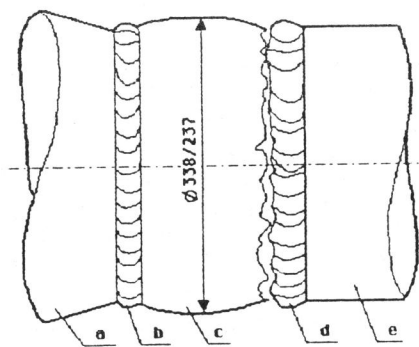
Schematic view of failure position: a) valve chamber b) manufacturing weld, c) append pipe, St 45.8 steel d) assembly weld, e) overheated steam pipeline, X20CrMo121 steel
